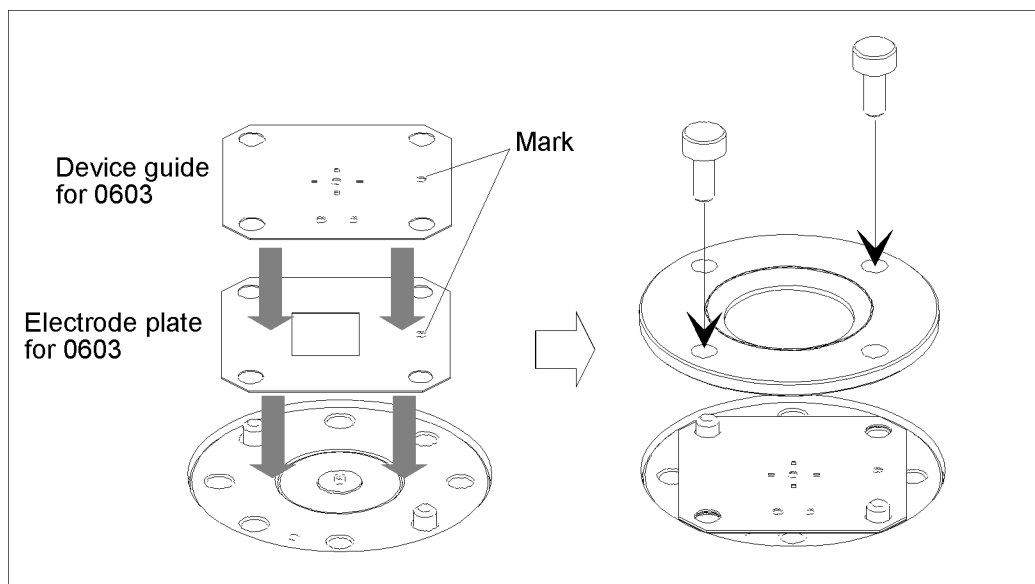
Mounting the Device Guide and Electrode Plate 0603
